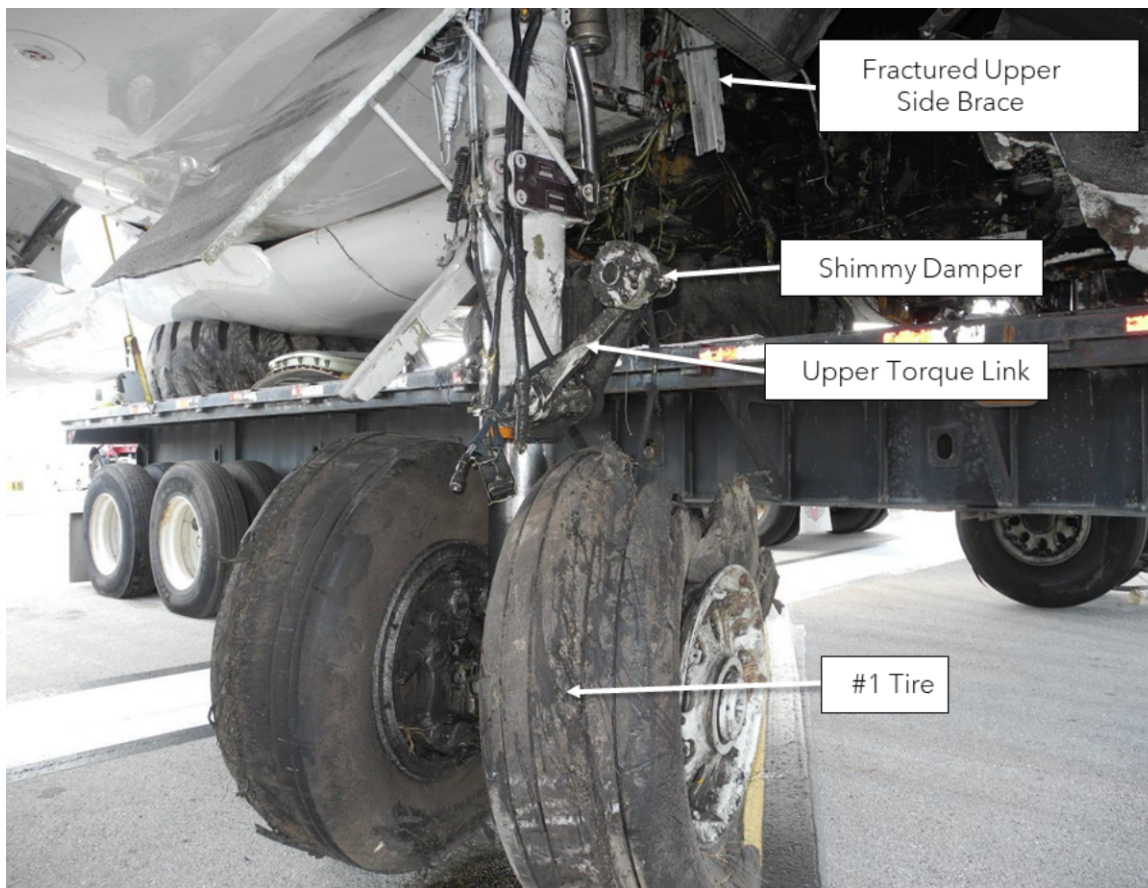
Photo of the left main landing gear after the accident looking inboard and slightly forward. Note that the landing gear assembly is facing outboard in the photo.
